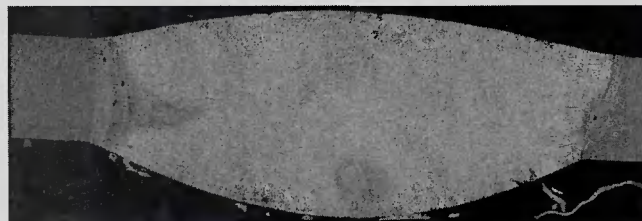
Weld made with preweld heat treatment at 750°F for 100 h in vacuum, DCEN, ER4043 (no etchant, 11X).
